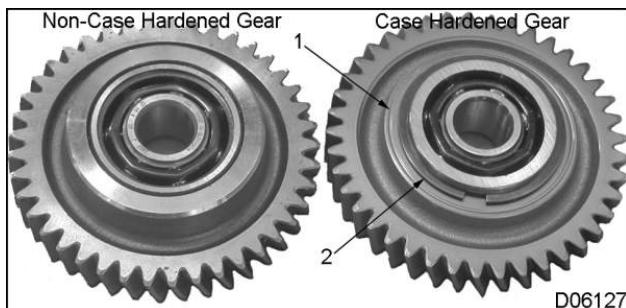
Note Witness Mark and Retaining Ring On Front of Idler Gear
